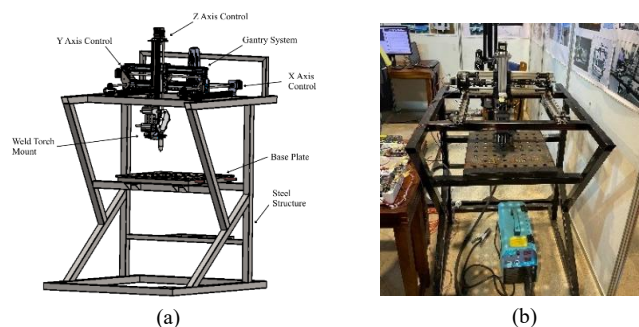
(a) CAD Model of the Machine; (b) Developed Prototype
